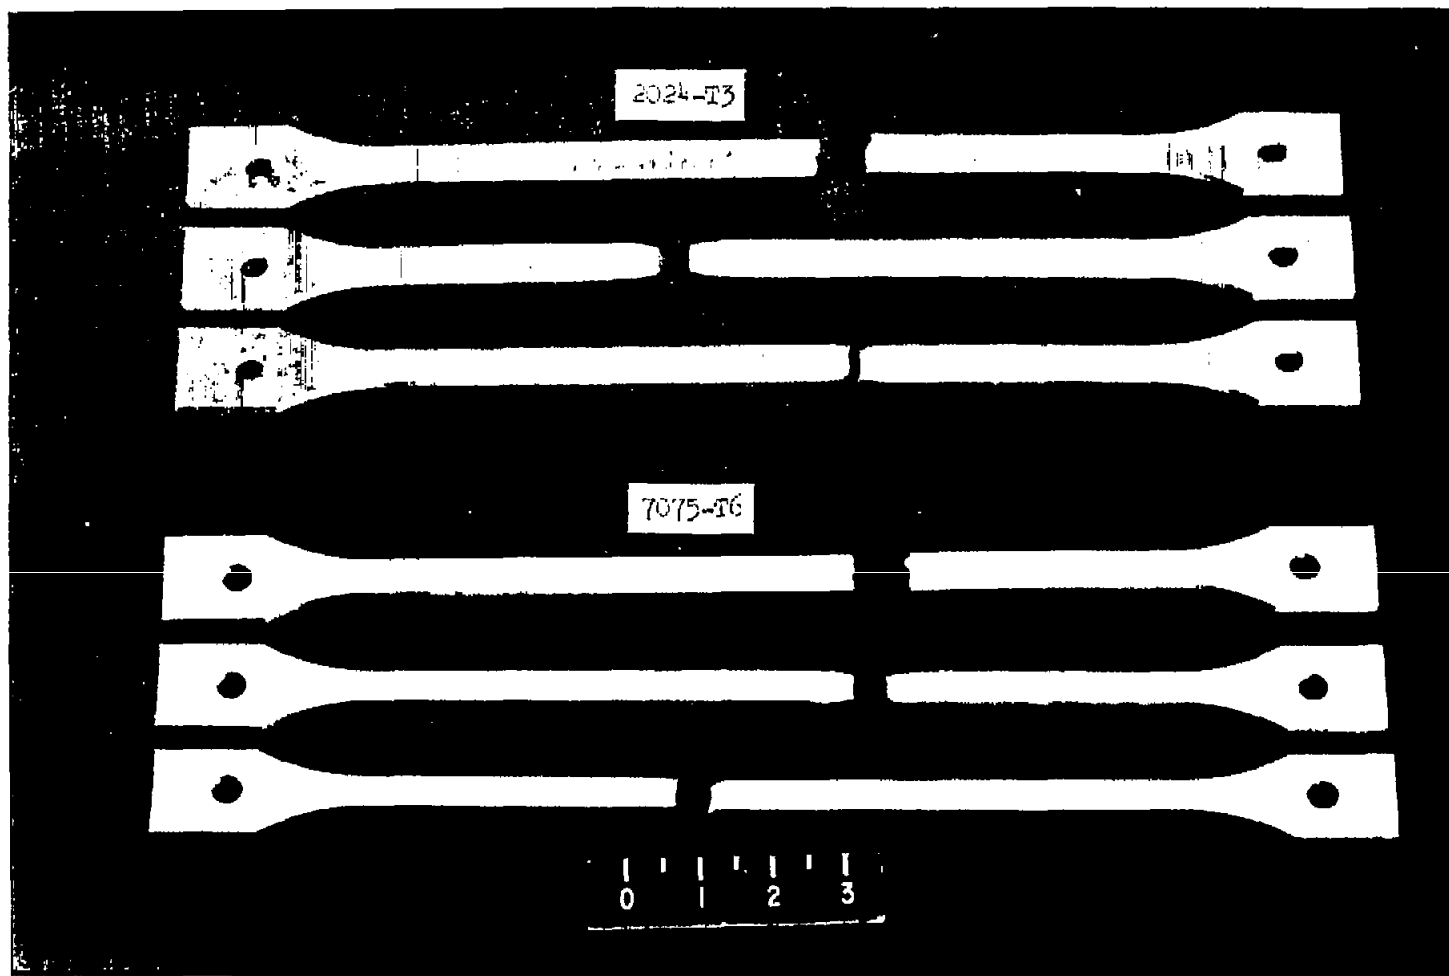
Fracture of 2024-T3 and 7075-T6 aluminum-alloy specimens. L-85329.1
